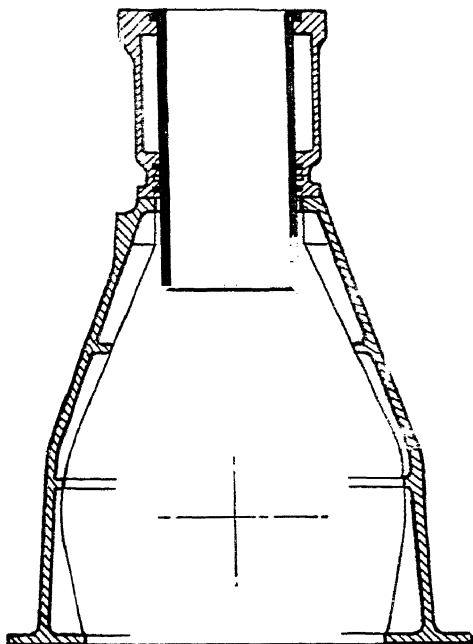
SEPARATE BLOCK AND CRANKCASE
